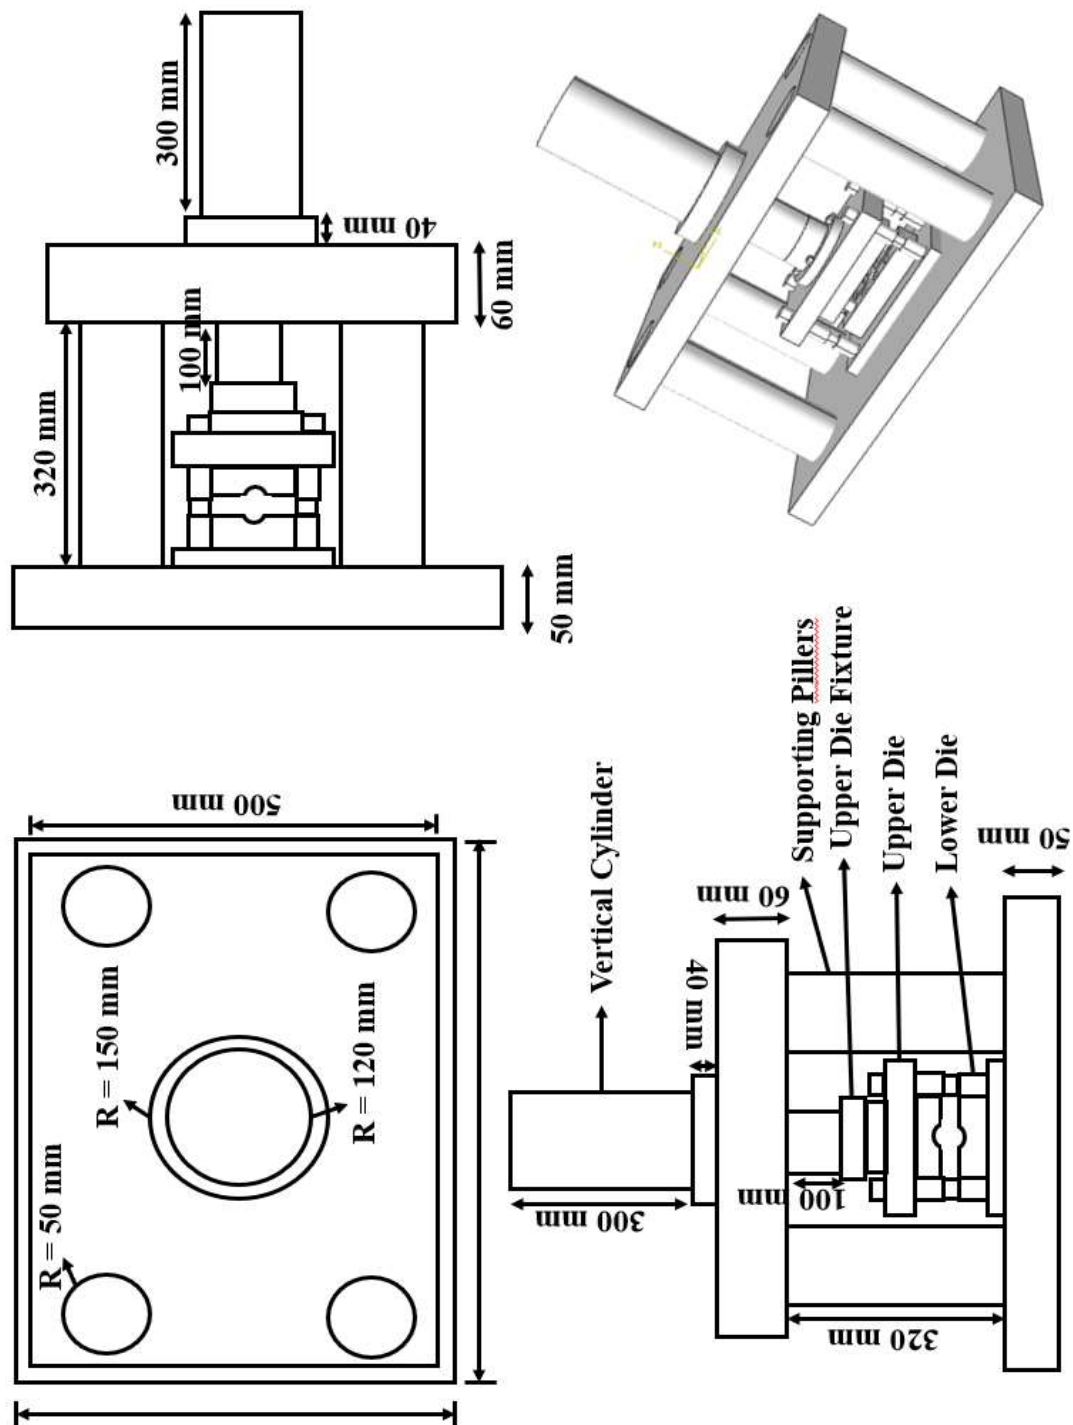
Drawing detail of assembly of upper cylinder with top, bottom supporting plate and die assembly connected to pillars
